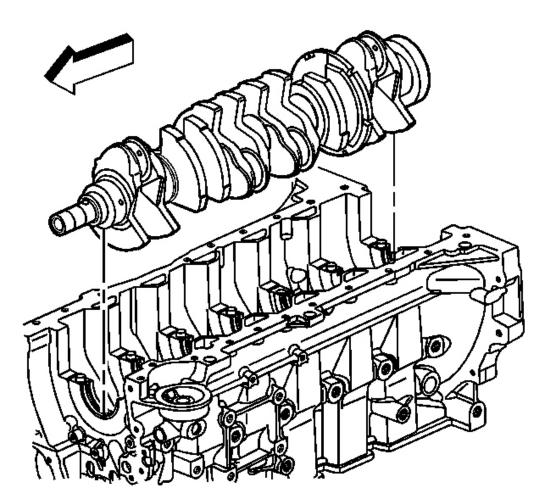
View Of Upper Crankshaft Main Bearing Halves Courtesy of GENERAL MOTORS CORP.
